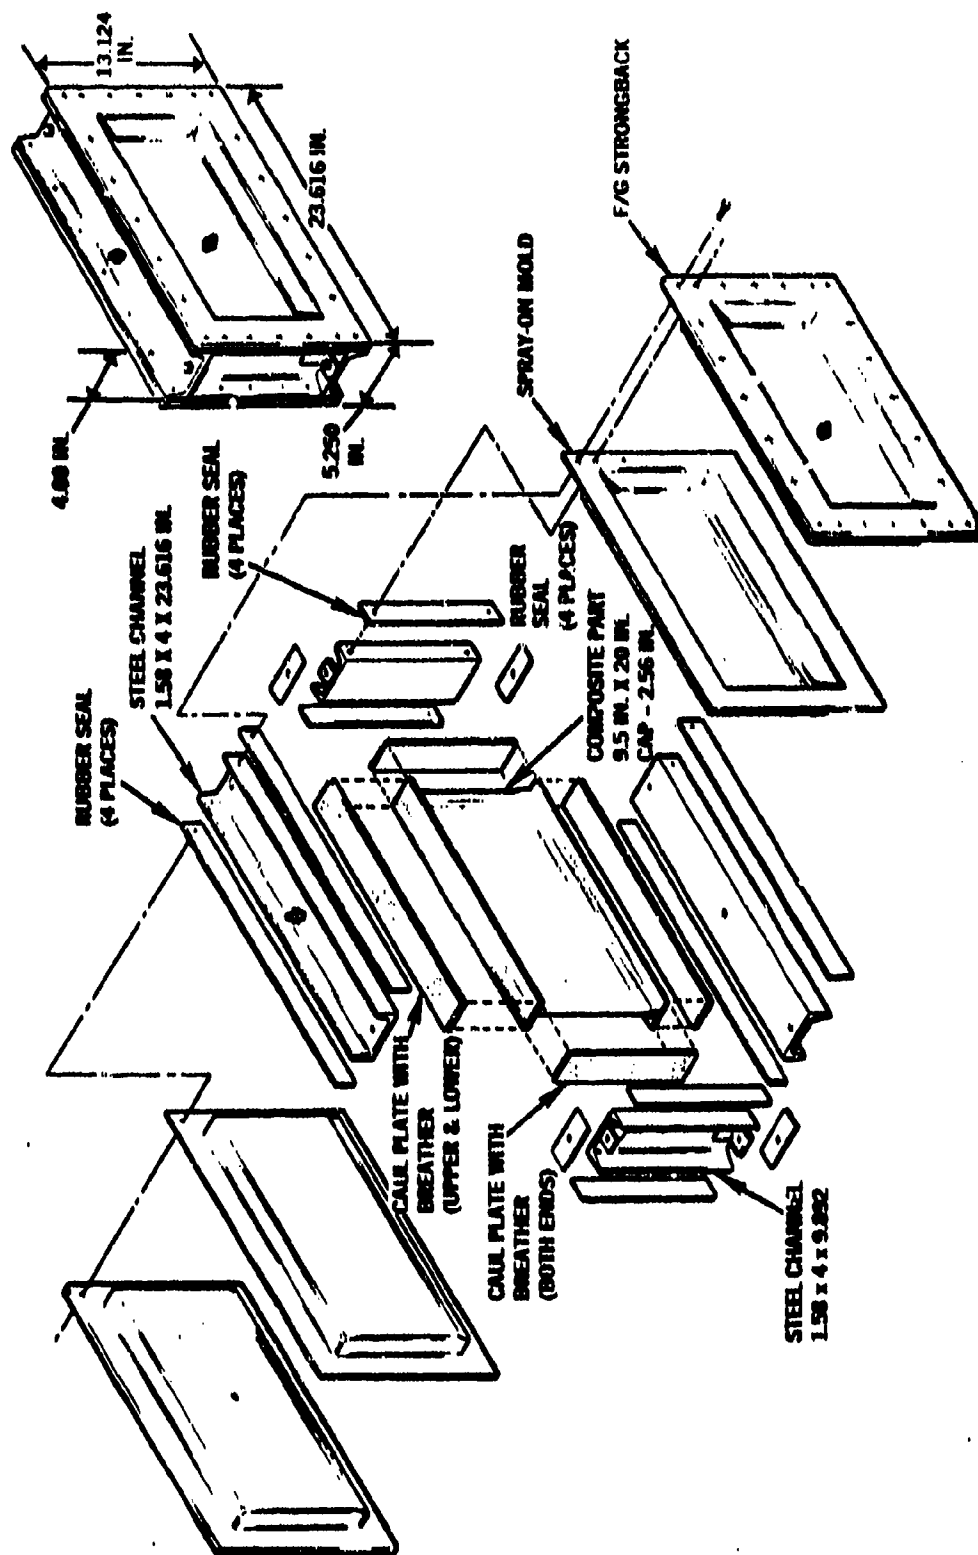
Typical I-Beam Monoclave Staging Tool (Exploded View)
